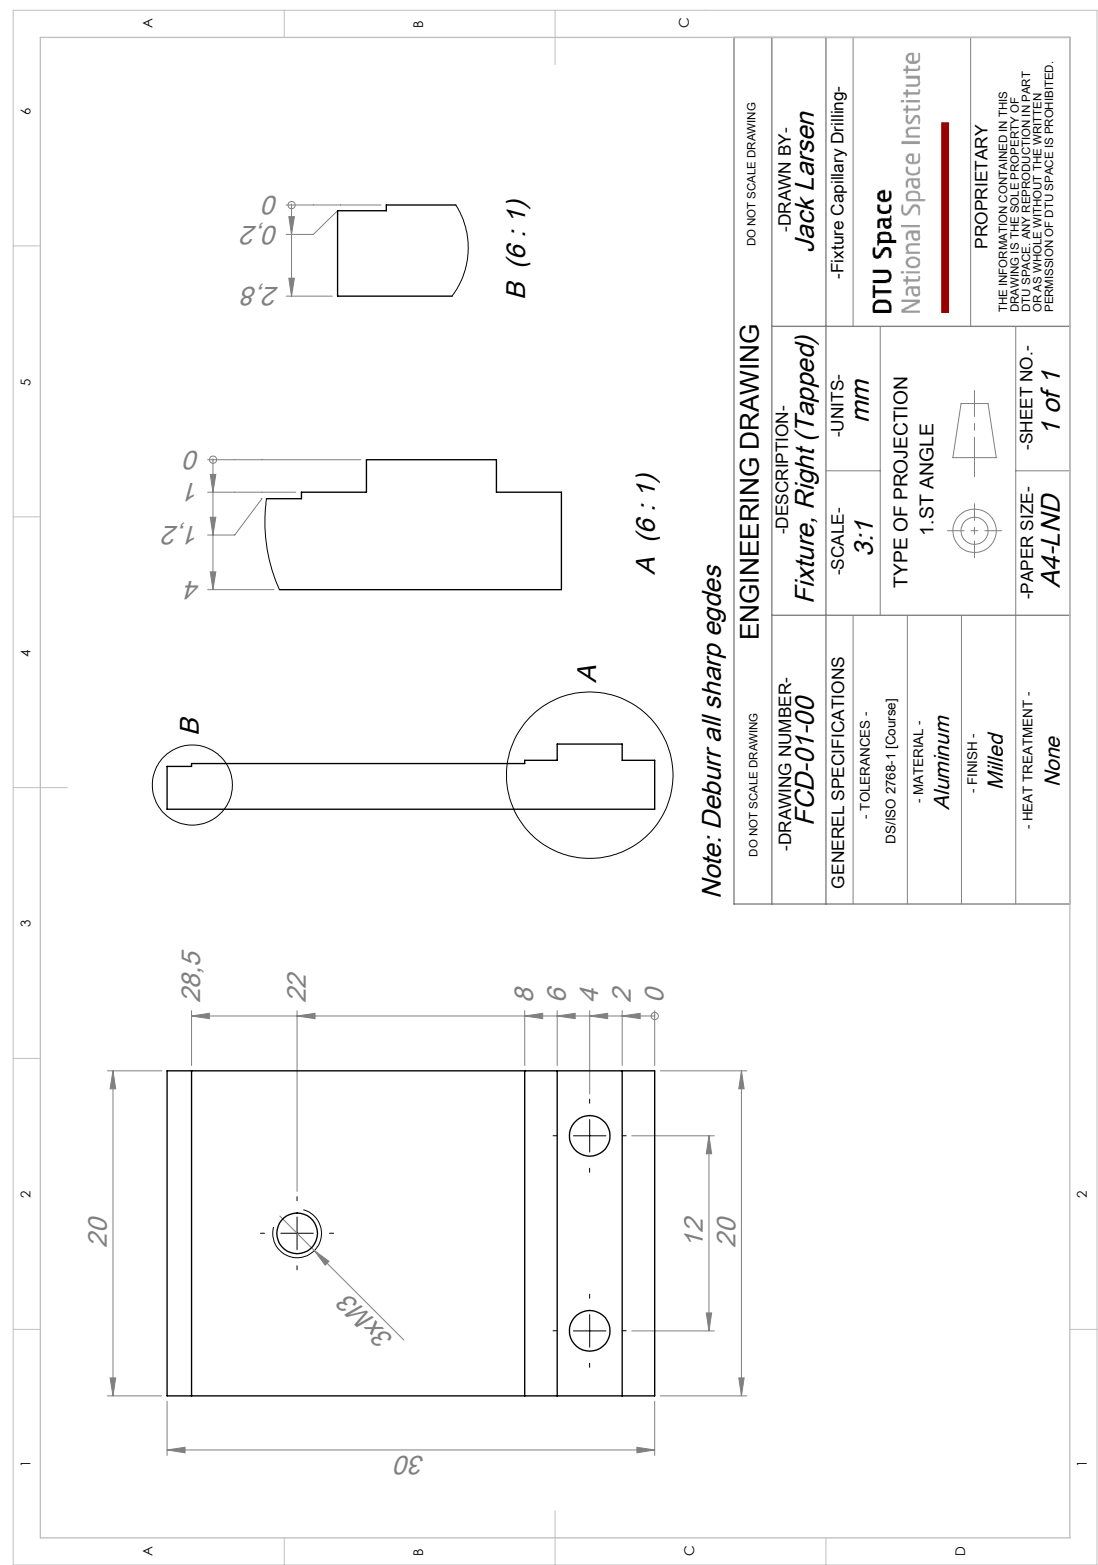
Milling Tools: Fixture for capillary drilling, right (tapped)
